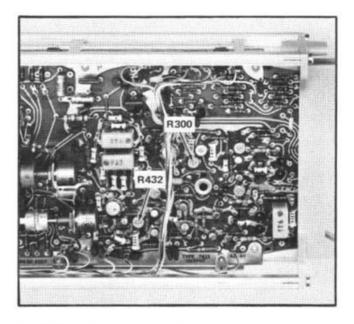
Partial view of the Output board showing locations of the high-frequency adjustments.
